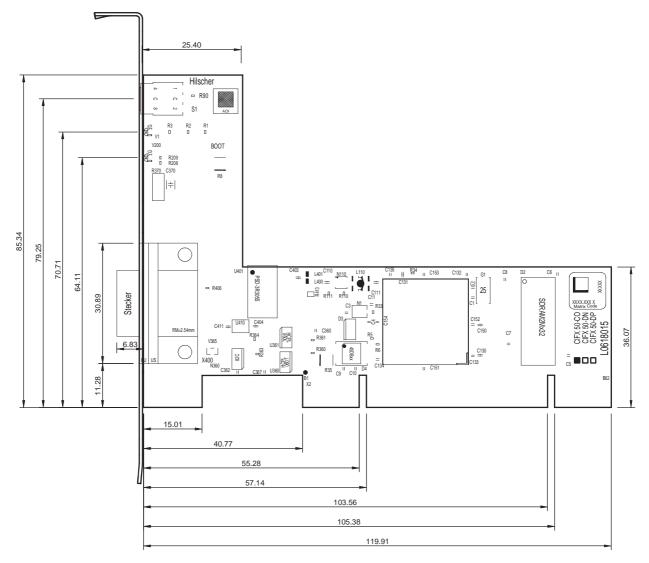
Dimensions CIFX 50-CO (Hardware-Rev. 5)
